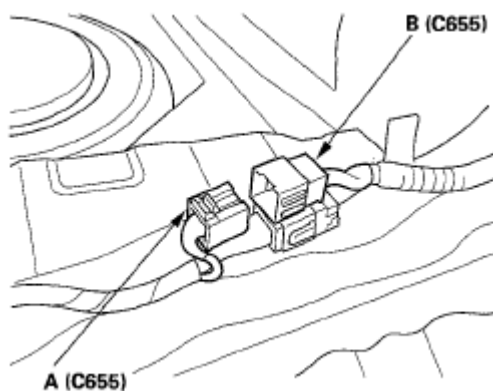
Identifying Right Side Wire Harness 16P Connector C655 And Left Side Wire Harness Connector C655
